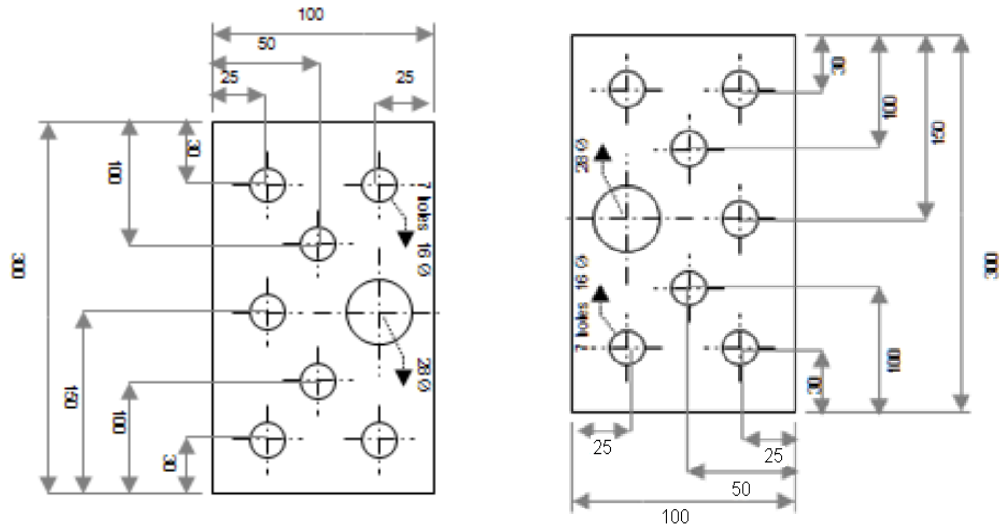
supporting plate configurations for both end of specimen (all dimension in mm)
